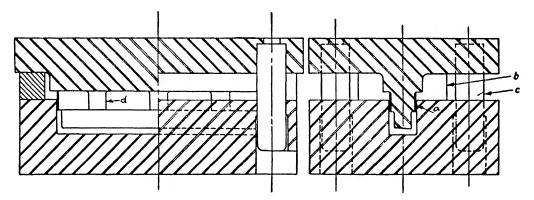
Positive type mold with stop blocks and sprue grooves: a, vertical flash; b, stop blocks; c, guide pin; d, sprue grooves.
